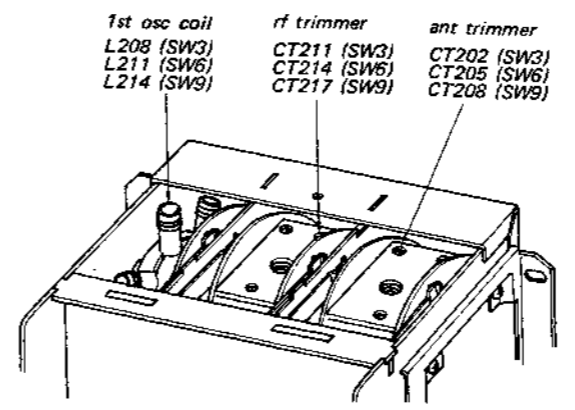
Adjusting parts for SW3, SW6, SW9
